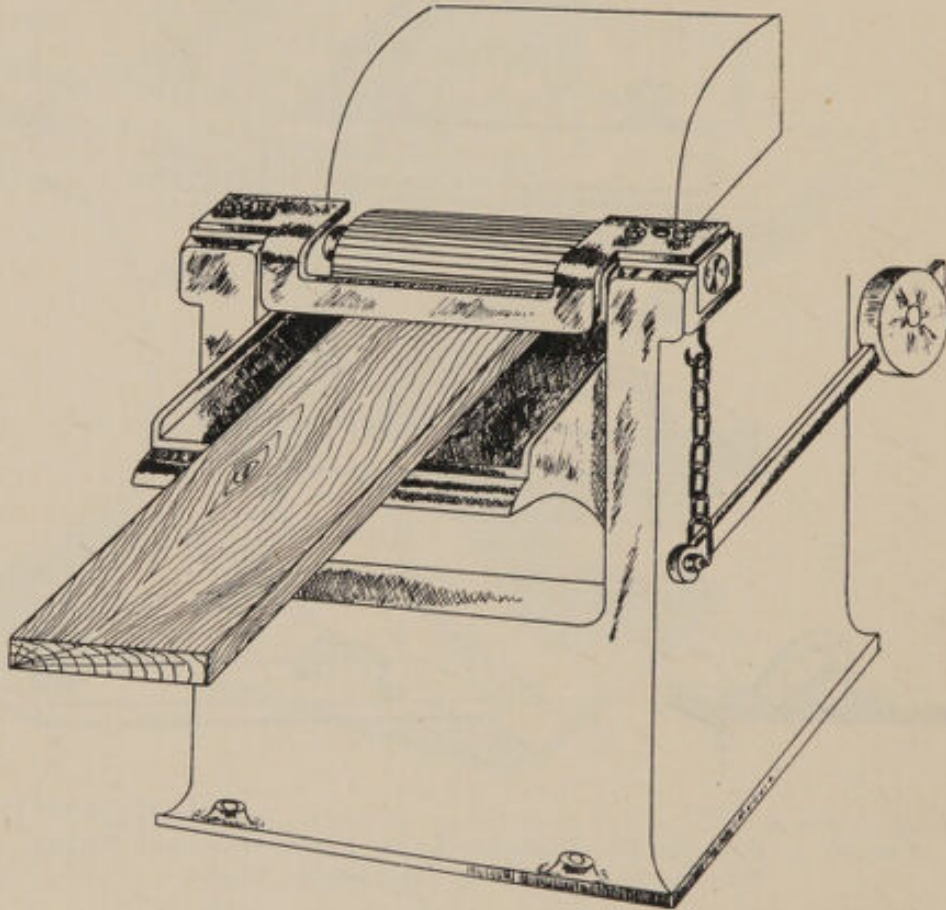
Planer Feed Roll Guards. Attached to the front top roller bearing and so obviating adjustment.
